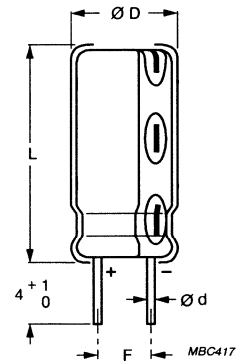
Form CB: Cut leads. For dimensions, refer to Table 2.
